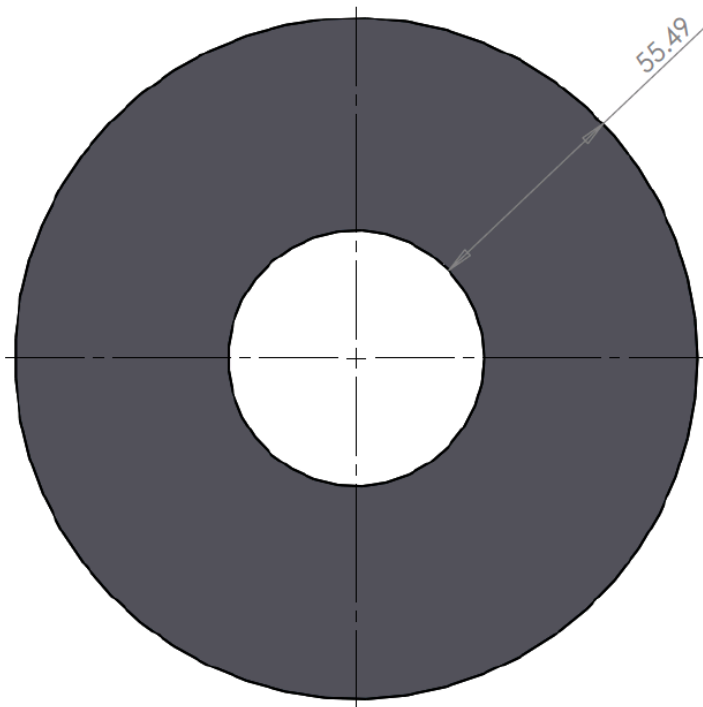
Modifying the impeller diameter by adding material; example dimension is for pump A.
